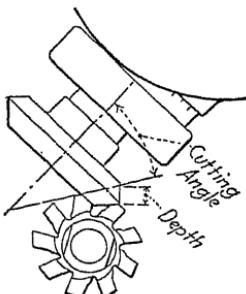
Diagram showing how the gear blank is mounted for milling. Kemp-smith Mfg. Co., Milwaukee.
